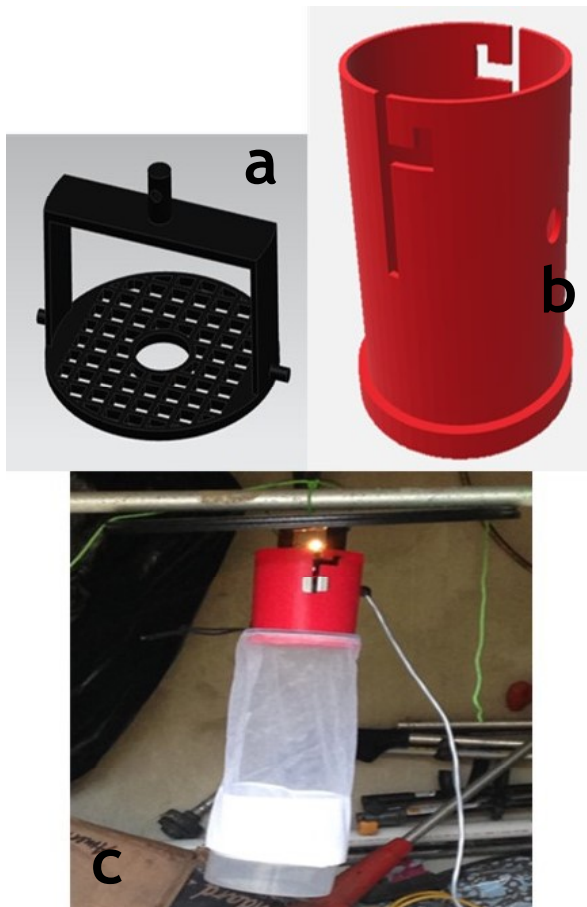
First trap (a) Filter CAD design, (b) Cylindrical body CAD design, (c) Complete set up.
